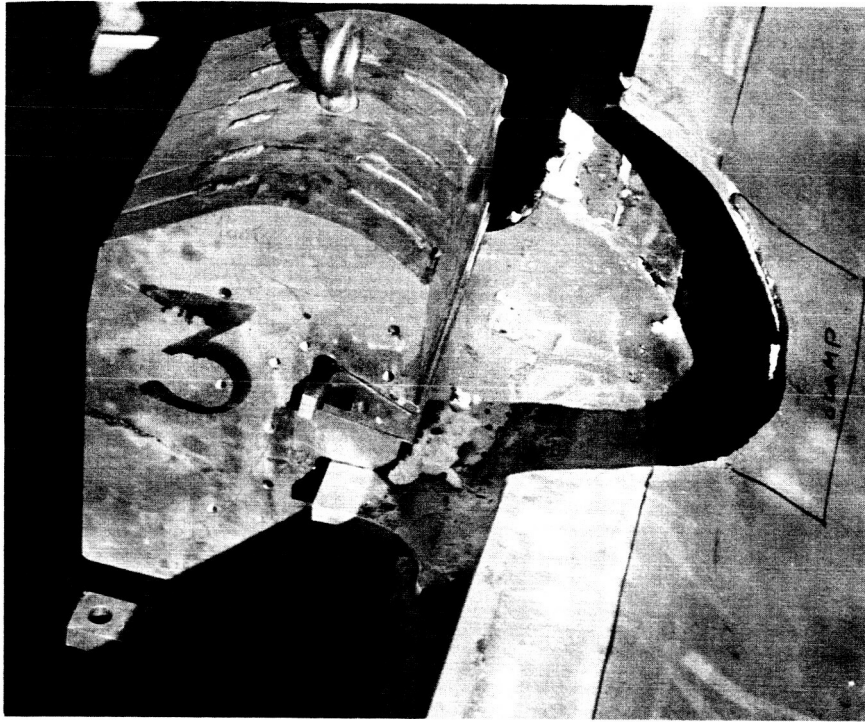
Weld Failure at Tab on Blank No. 3
